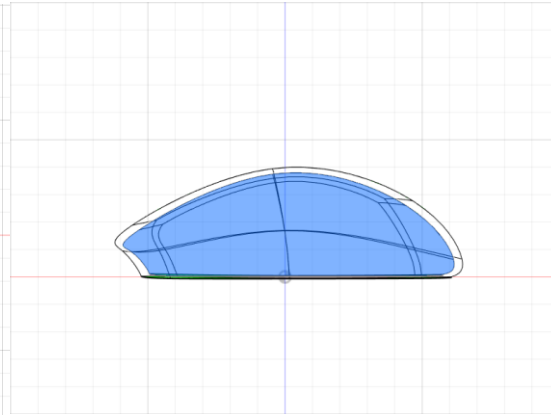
Wireframe View Front. Inner Obstacle Geometry
